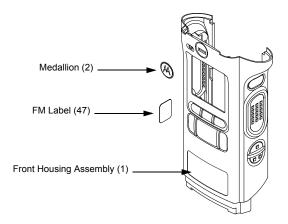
Main Housing Assembly (Dual Display Version, Limited Keypad)
